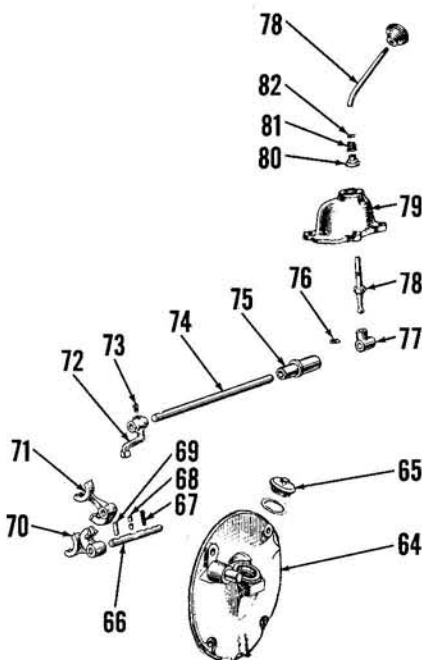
Exploded view of main transmission shift mechanism. Refer to Fig. 127 for view showing inner side of plate (64).
